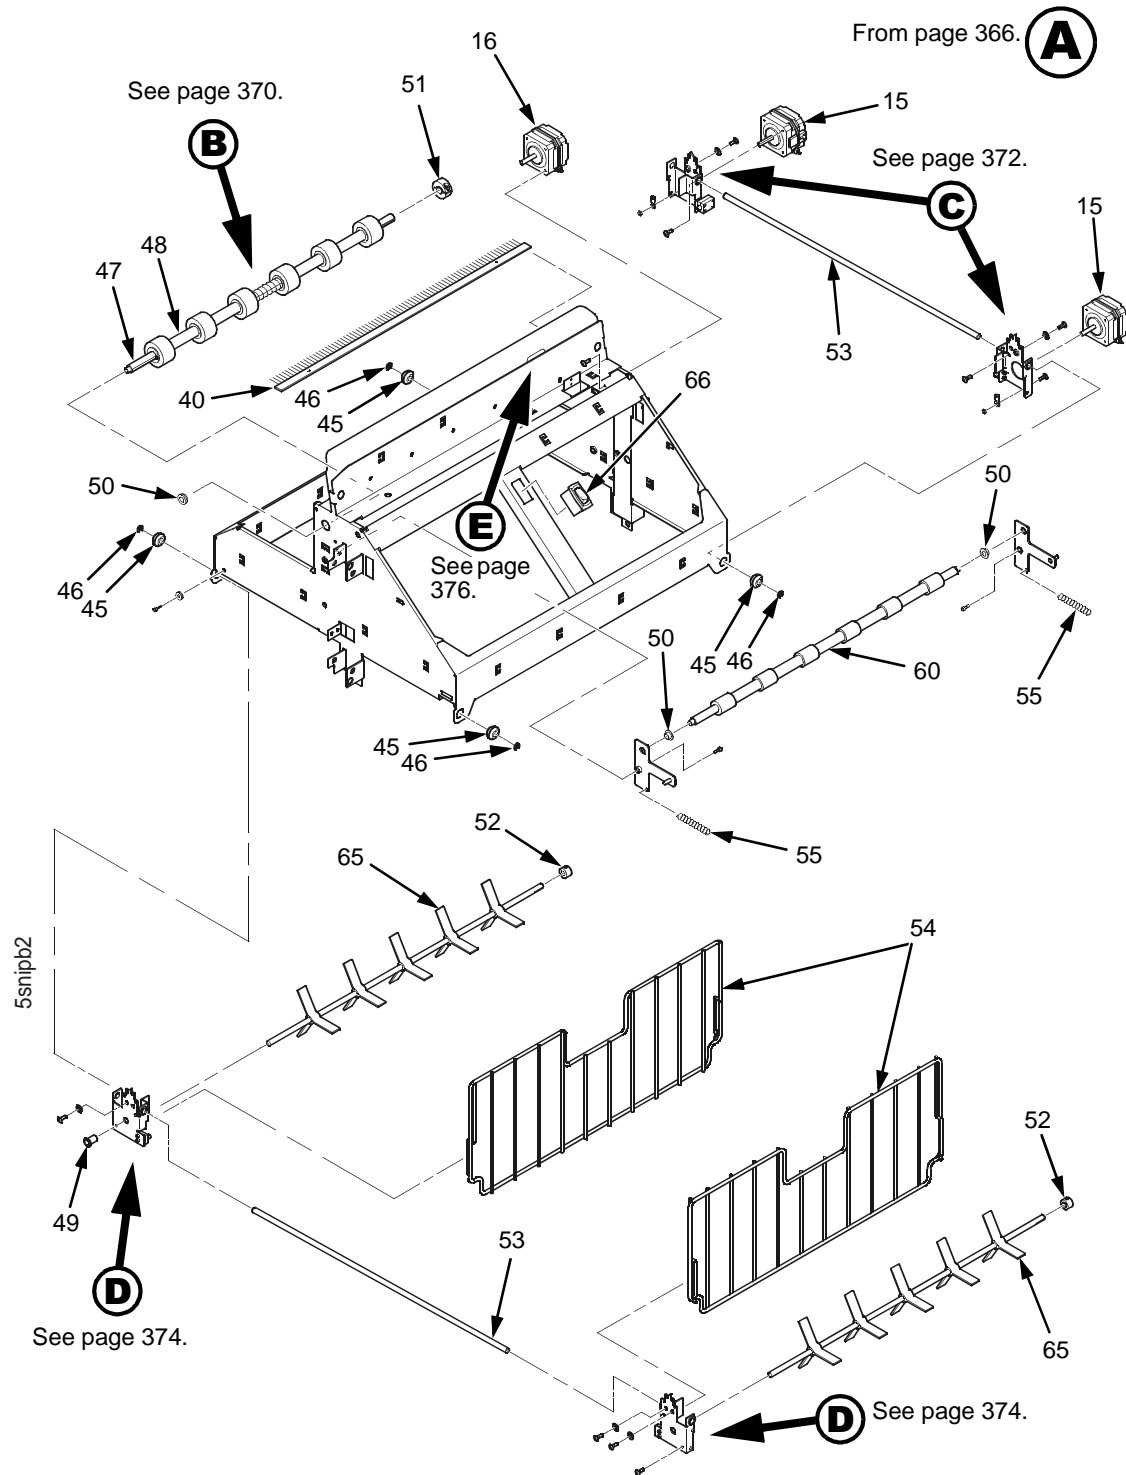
Elevator Detail: Motors, Rollers, and Paddles
